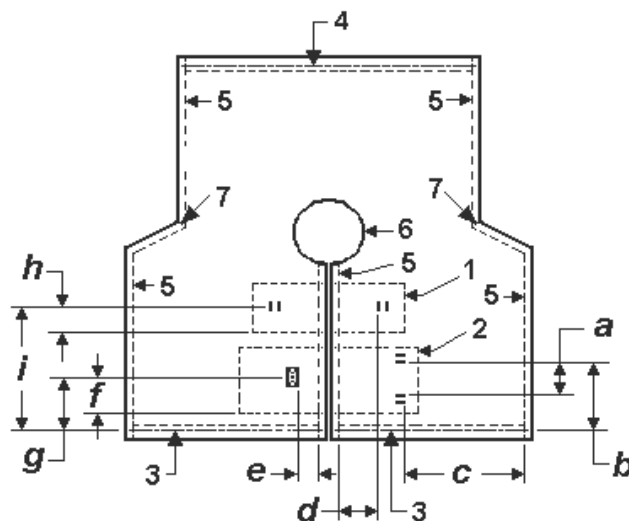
Chest strap assembly (adjustable part left and fixed part right)
